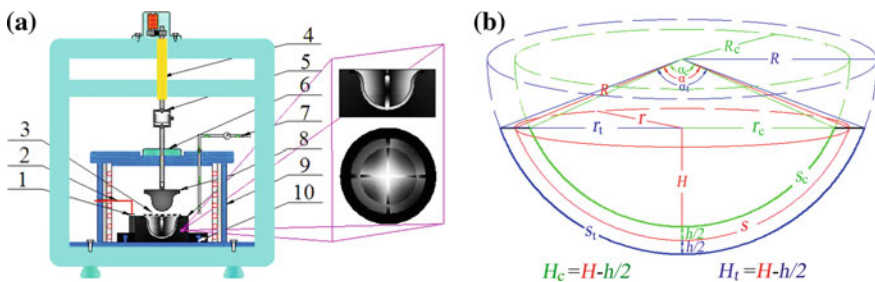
Deformation schematic diagram and geometric schematic diagram of deformed CAF. 1-Temperature-controlled CAF; 2-Thermocouple; 3-CAF plate; 4-Power device; 5-Pressure sensor; 6-High-temperature seal ring; 7-Inert gas; 8-Graphite mold; 9-Crucible furnace; 10-Limit guide rails
